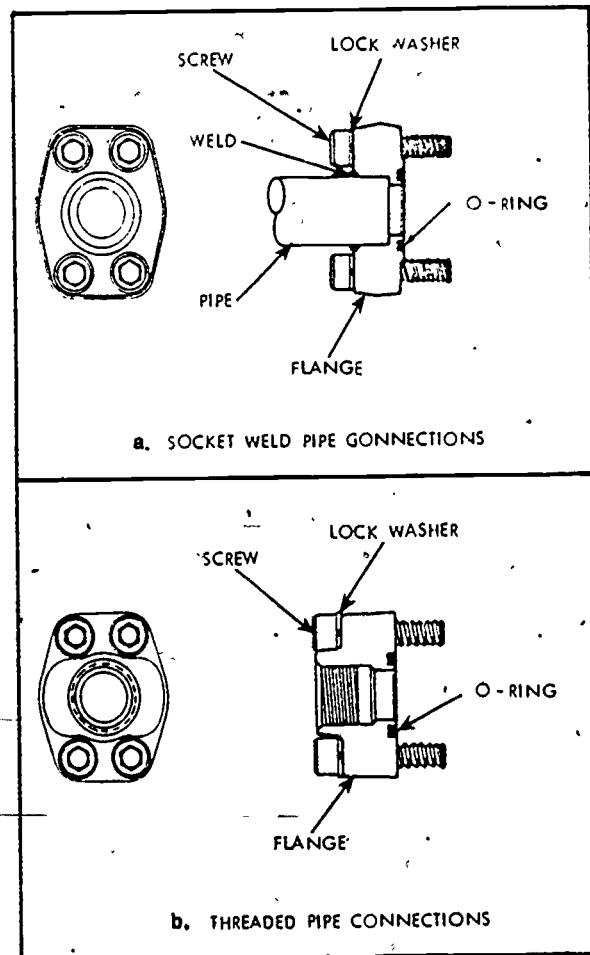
Flanged Connections for Large Pipes (Straight-Type).
